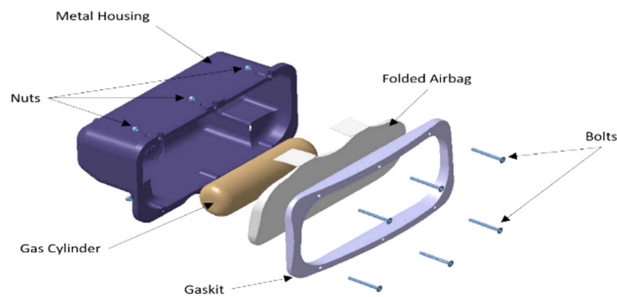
Exploded view of front bumper's airbag enclosure design.
